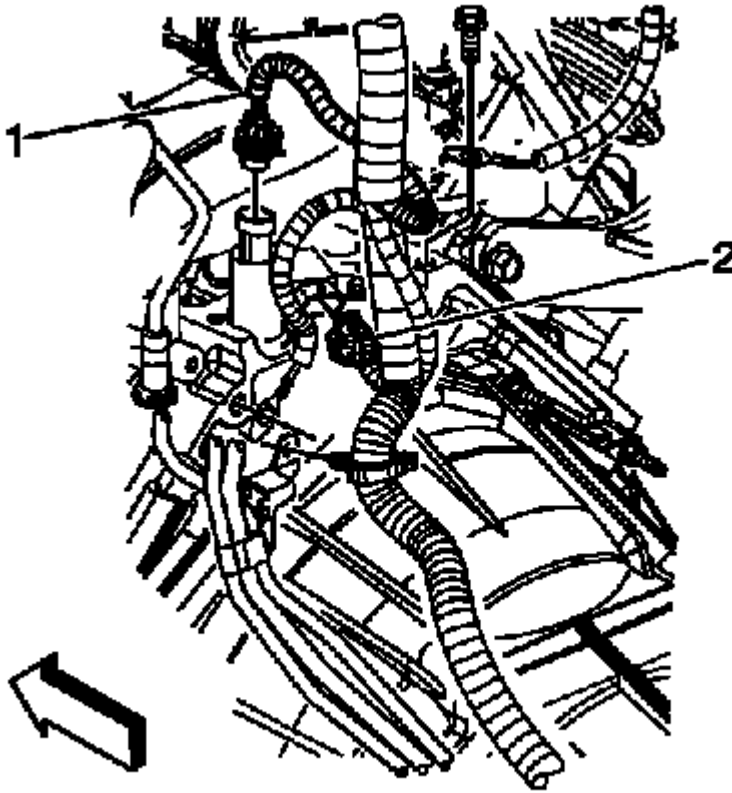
View Of Oil Pressure Sensor & CMP Sensor Connectors
